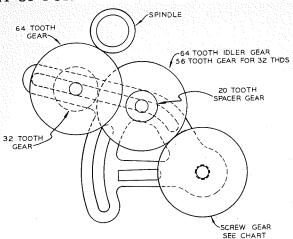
Gear set-up for 18 through 32 threads per inch.
